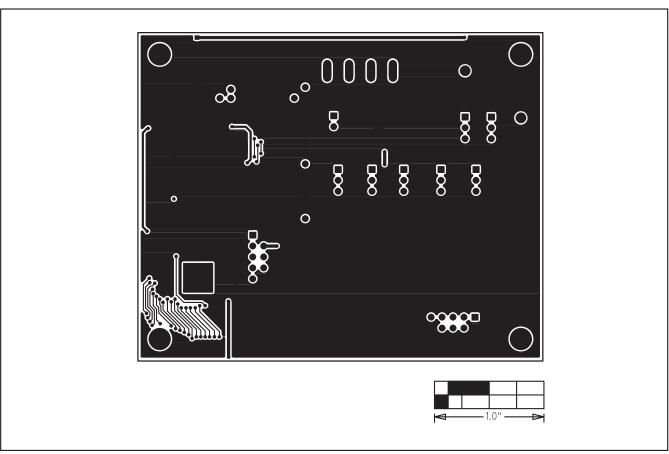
MAX14514 EV Kit PCB Layout—Solder Side
